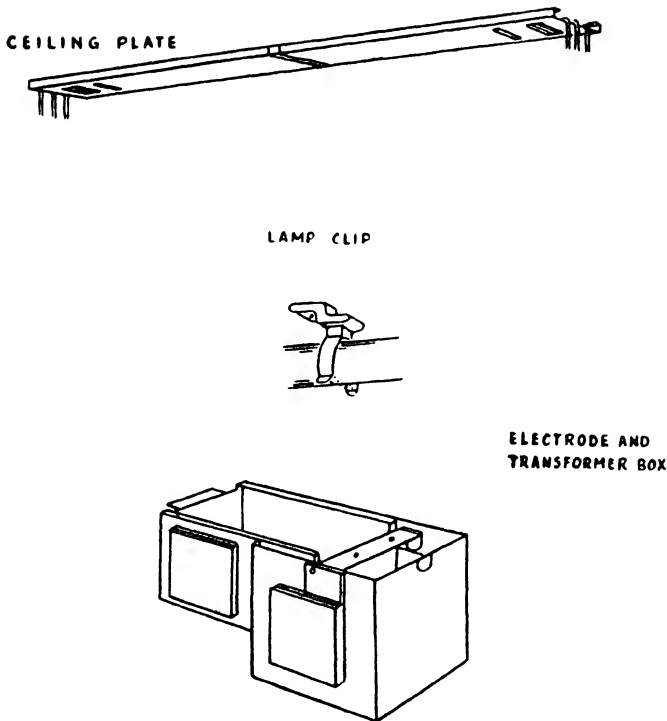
Cold Cathode Fluorescent Lighting Assembly.
